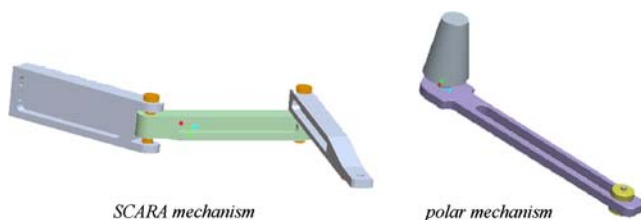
The examples of serial mechanisms for decoupling of driving machine’s axes
